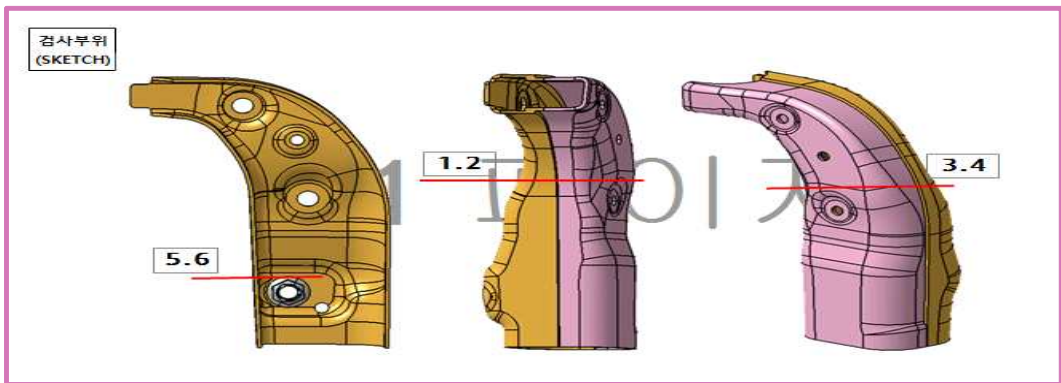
Measured location of welded joint in single mold(LH) for the inspection
